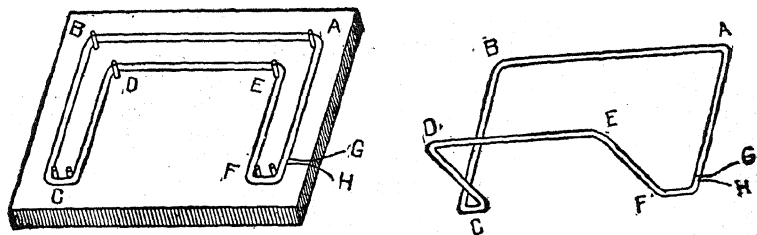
Method of winding evolute coils. *In making the former*, it is necessary to know the dimensions of the coil, hence, a pattern coil must first be made, from which the spacing of the pins can be taken so that the completed coil will fit into the slots for which it is intended. After the pins have been properly spaced on the board, the wire is wound around them as indicated, as many turns being taken as decided on for each coil. When the coil is thus completely wound, it is taken from the pins, and the lower ends, C and F, placed in a suitable clamp. The two halves of the coil are then spread apart, the coil assuming the shape illustrated in fig. 814.
